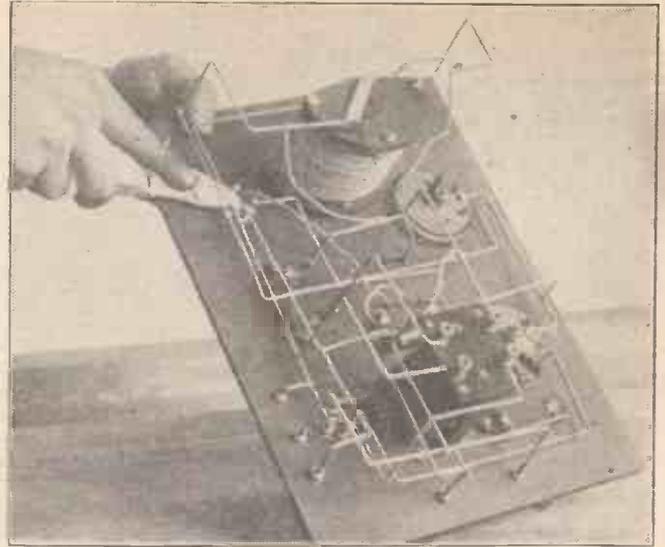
A view of the lay-out and wiring at the back of the panel.
